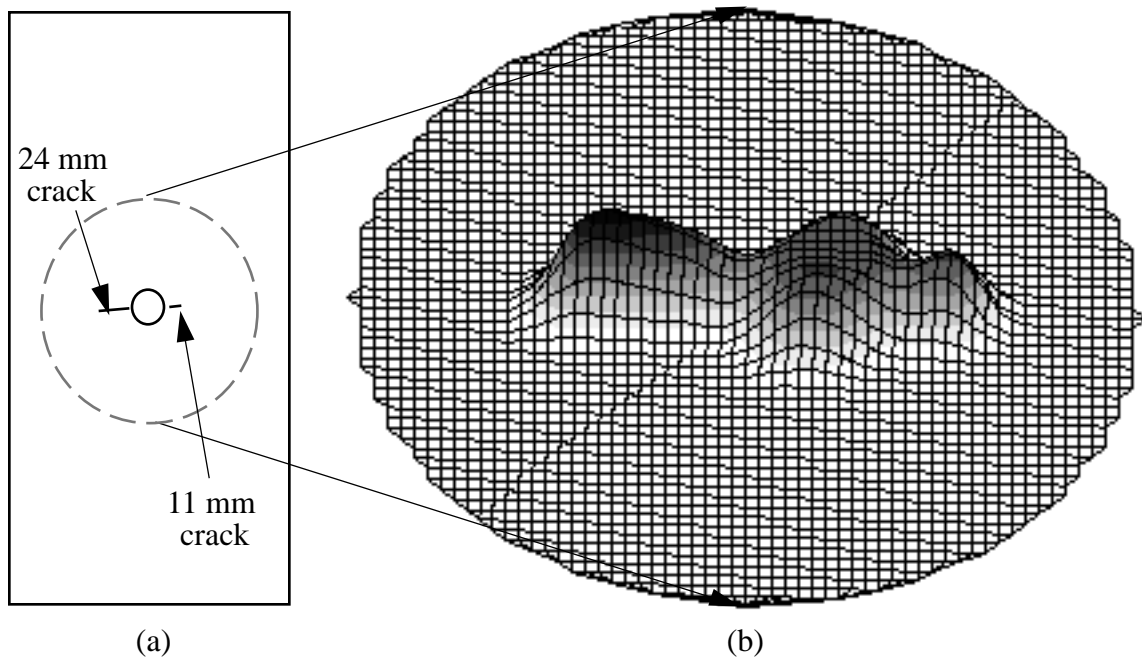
(a). Schematic illustration of the geometry of the fatigue cracks. (b). Scan image of the fatigue cracks and center hole obtained using a 1.25 cm diameter probe at 50 kHz.
